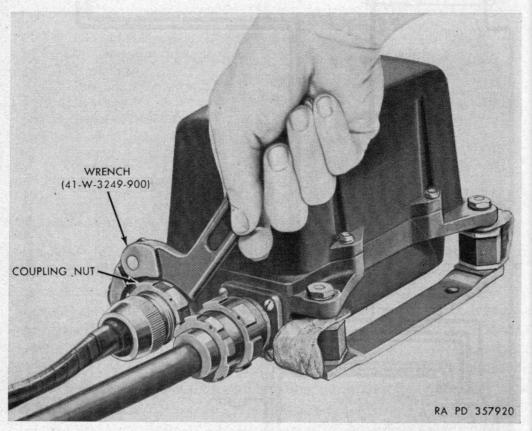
Tightening connector coupling and on generator using spanner wrench—41-W-3249-900.
